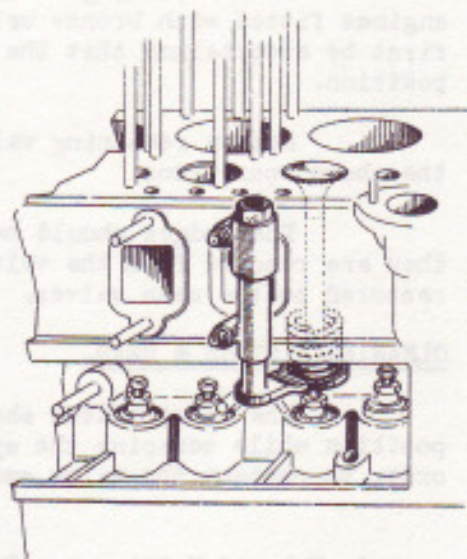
EXHAUST VALVE SPRING COMPRESSING TOOL IN POSITION.
